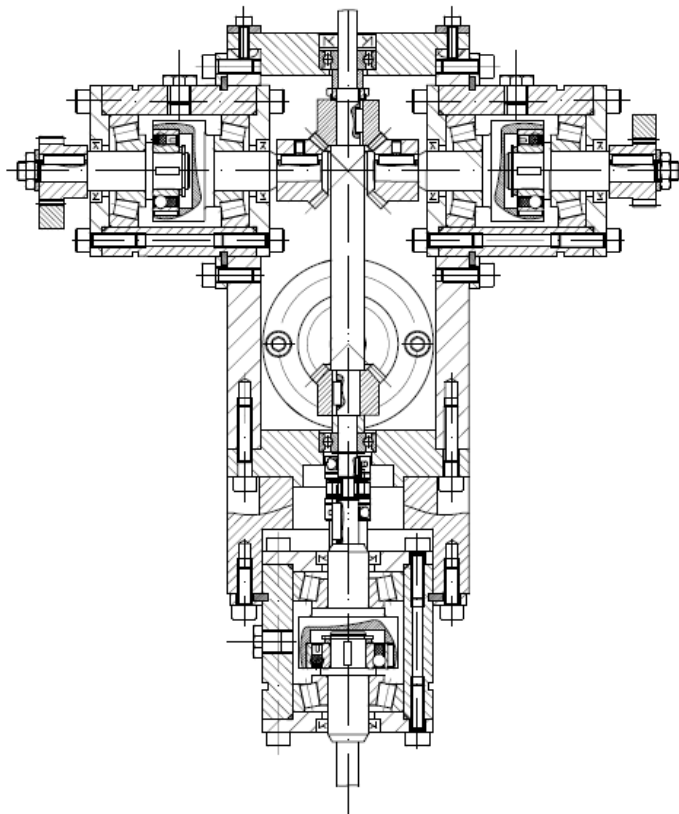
Two-dimensional technical drawing of the WEC's Transmission
